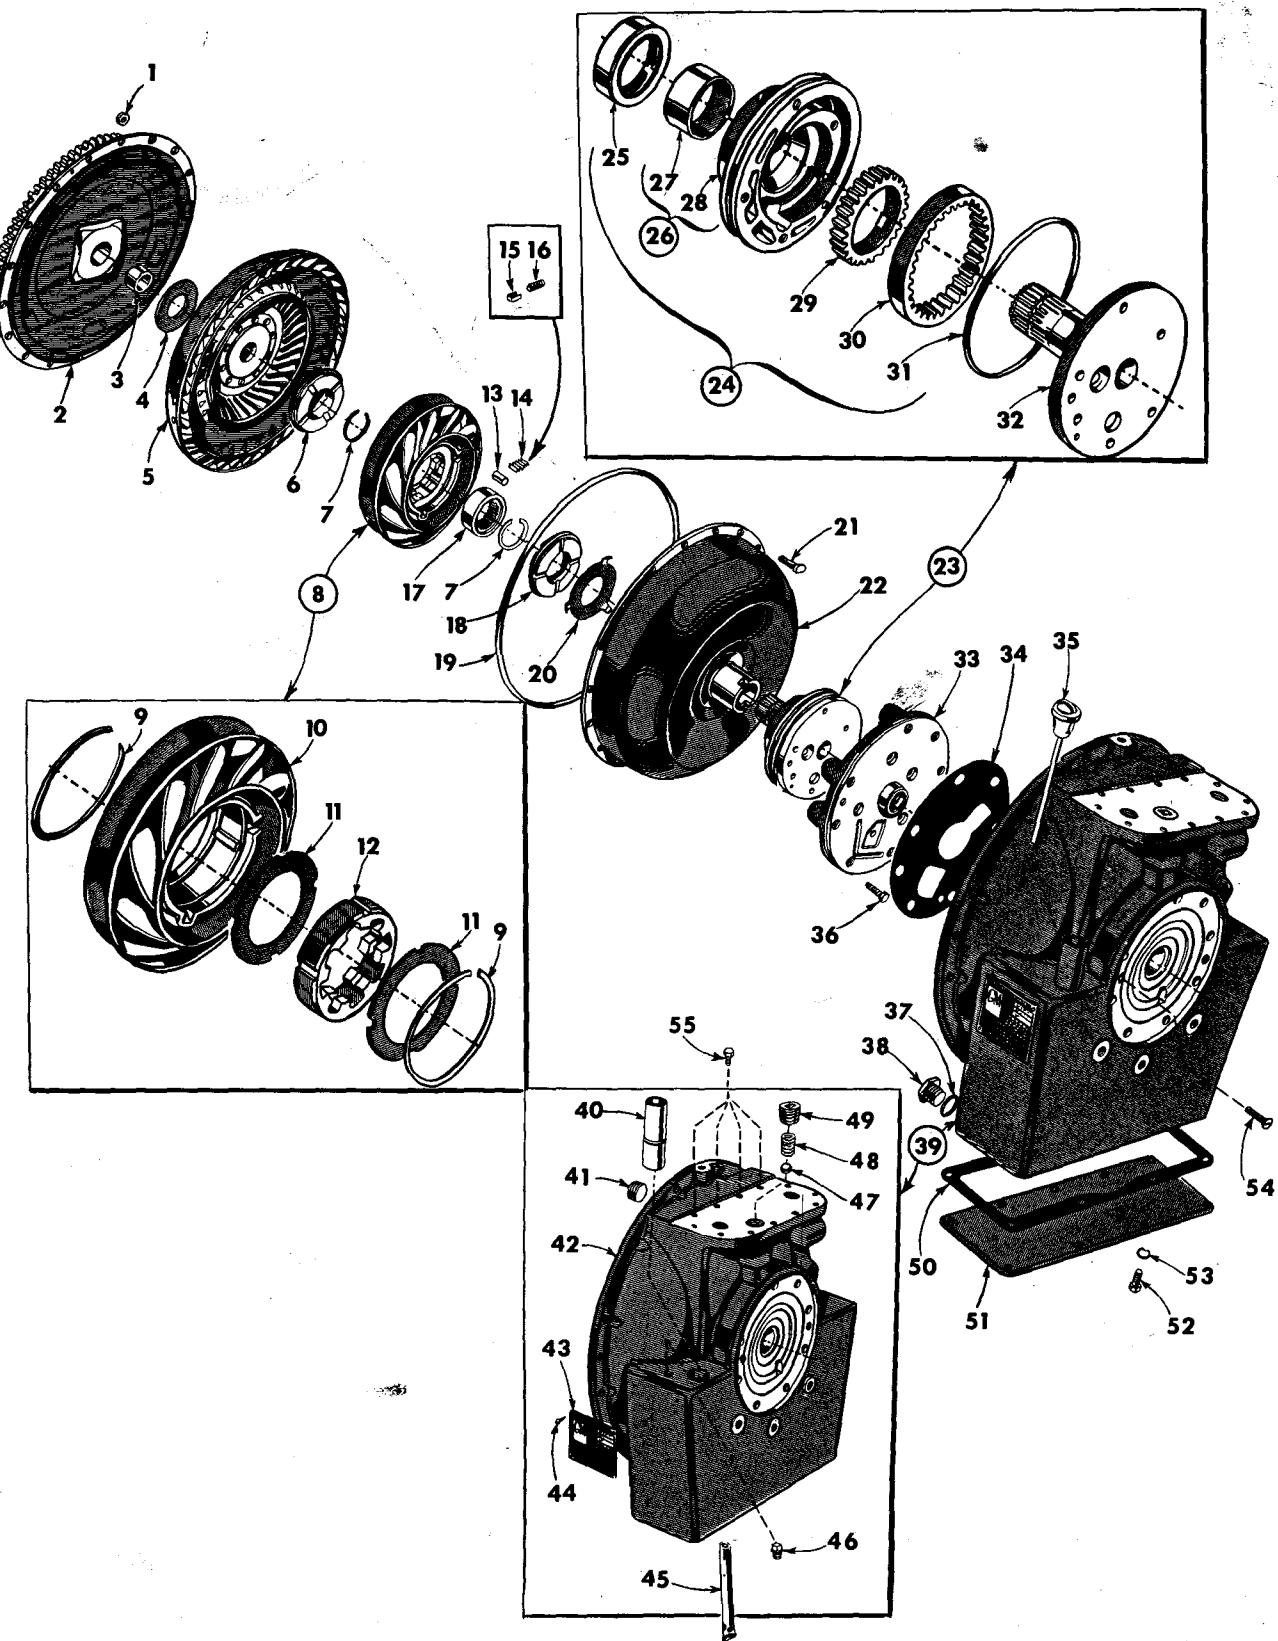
SERIES BASIC TORQMATIC CONVERTER, EXPLODED VIEW
